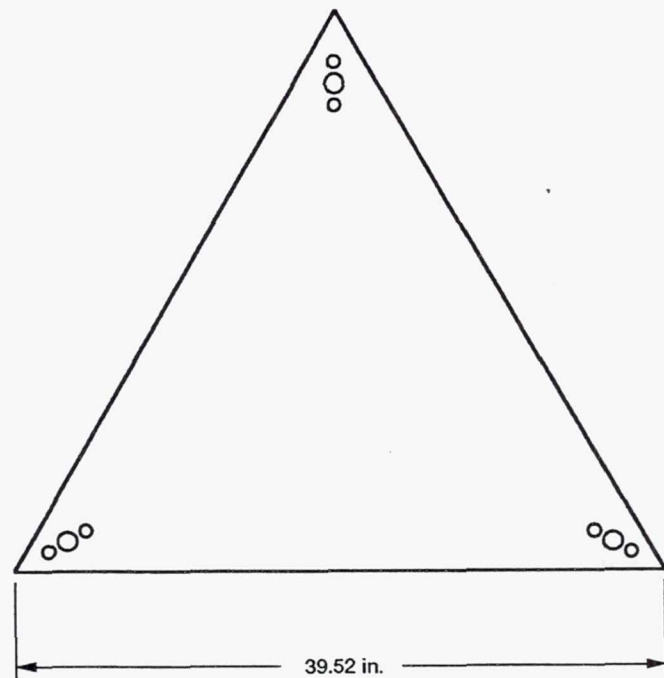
Basic facet dimensions. (Dimension shown is point to point; 0.866 in. removed from each corner (1 in. on a side).)
